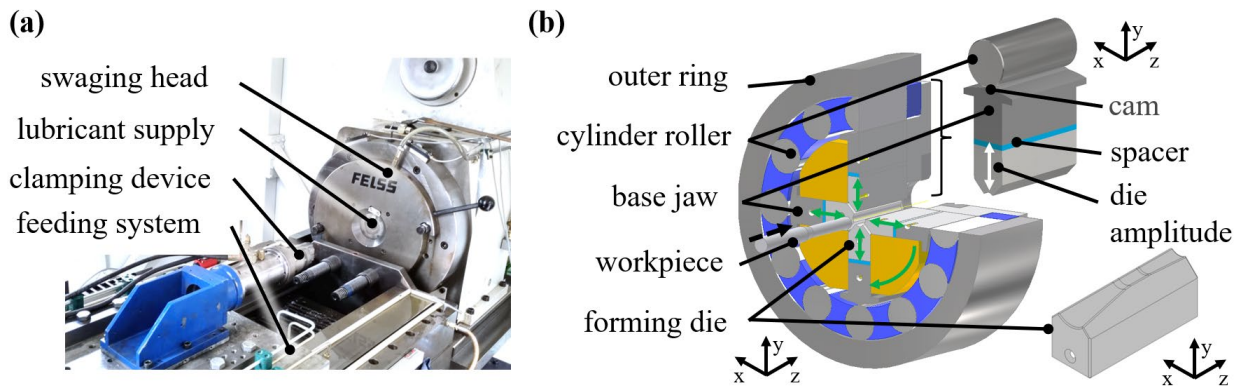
Rotary swaging machine: (a) picture of the rotary swaging machine, (b) schematic drawing of the machine parts, pressure column (top right) and forming die (bottom right)
